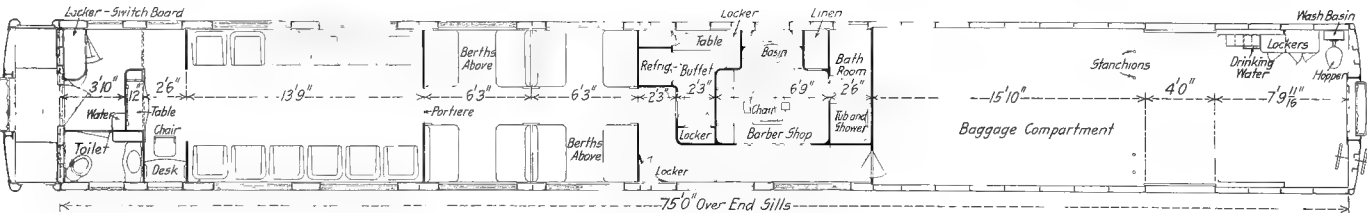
Floor Plan of Union Pacific Baggage-Buffer Car. Builder, The Pullman Co.
